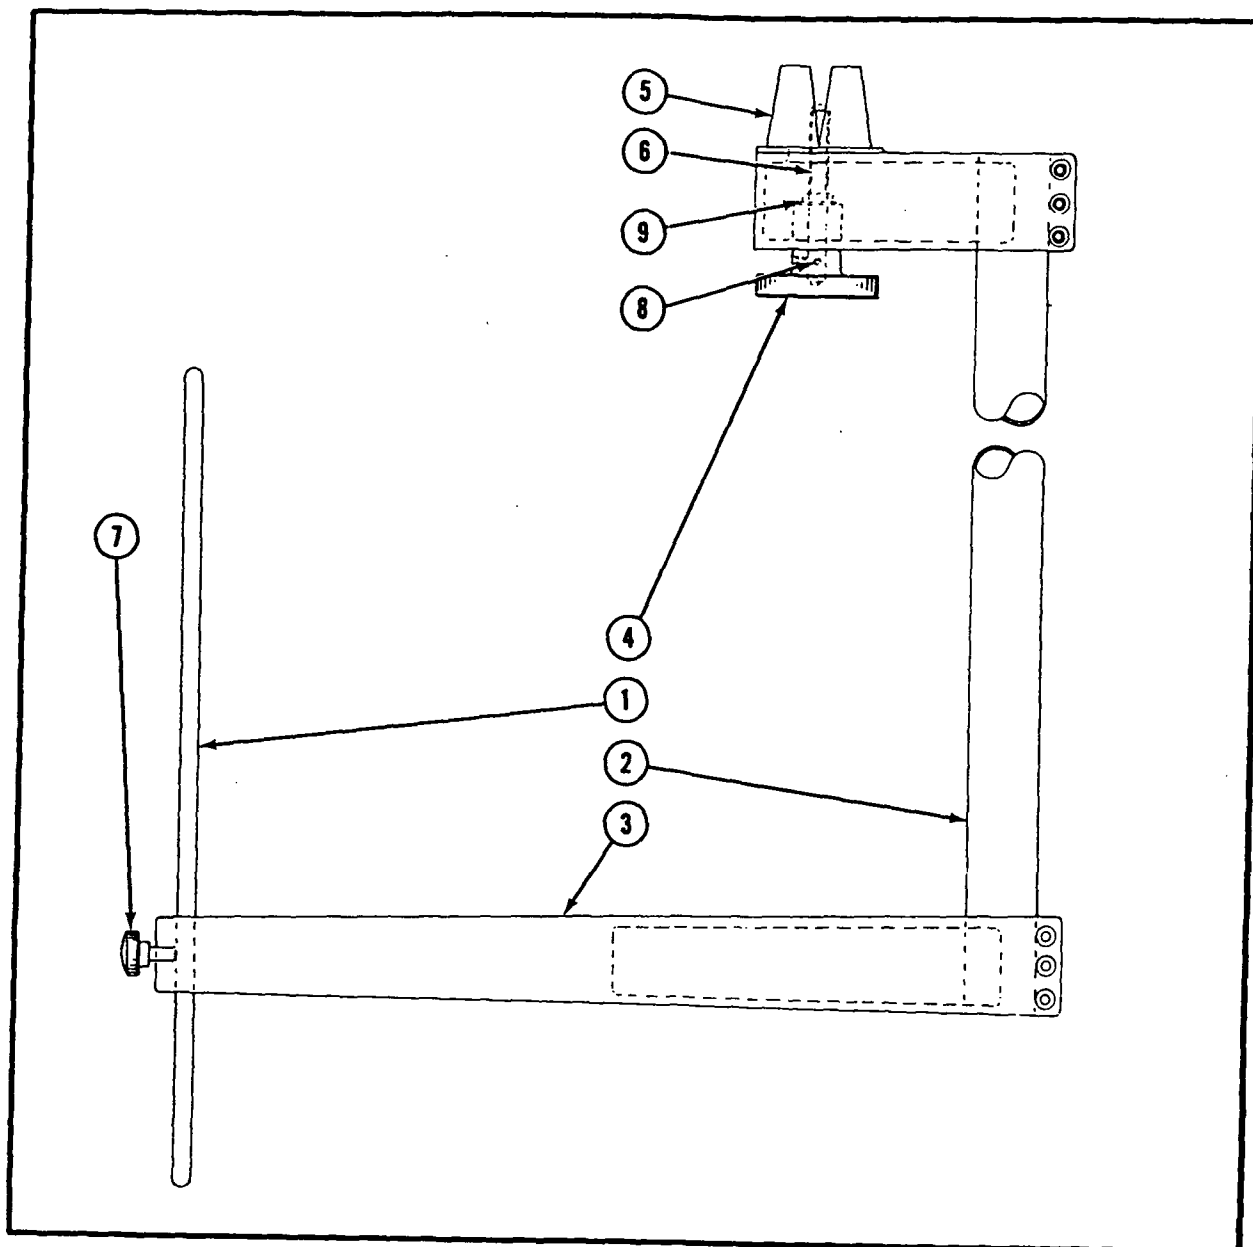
COBALT, BACKPOINTER ASSEMBLY
